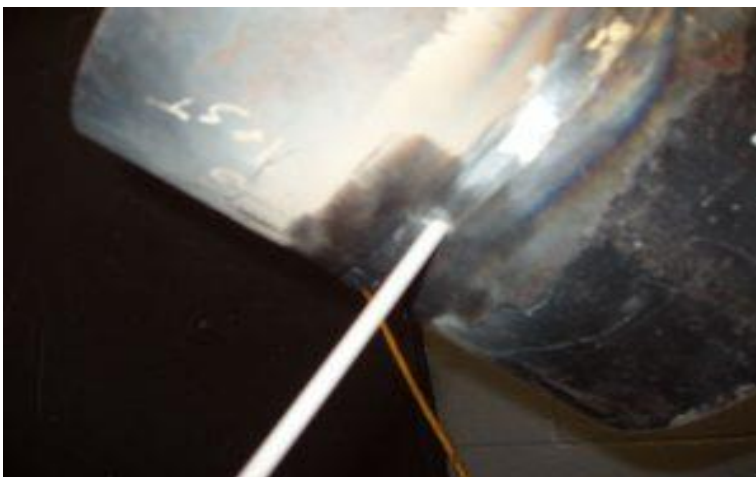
The rod to the hot pass. Hold this side and then move to the other side after about a second.
